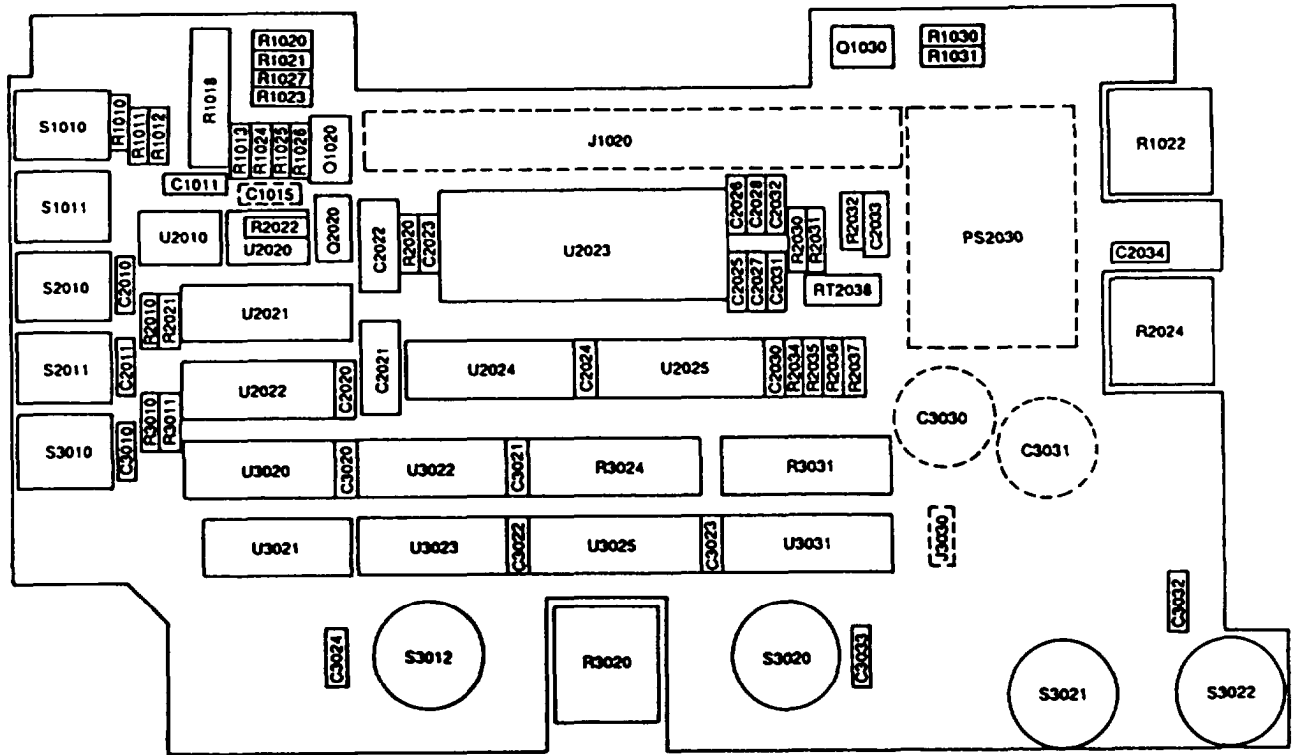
Front Panel Assembly (Sheet 2 of 2)
